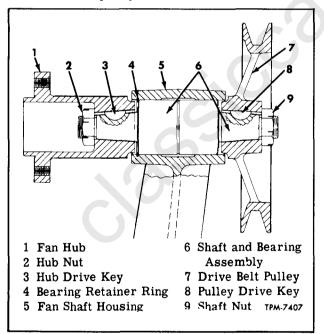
Fan Shaft and Housing Assembly (RM 80)
